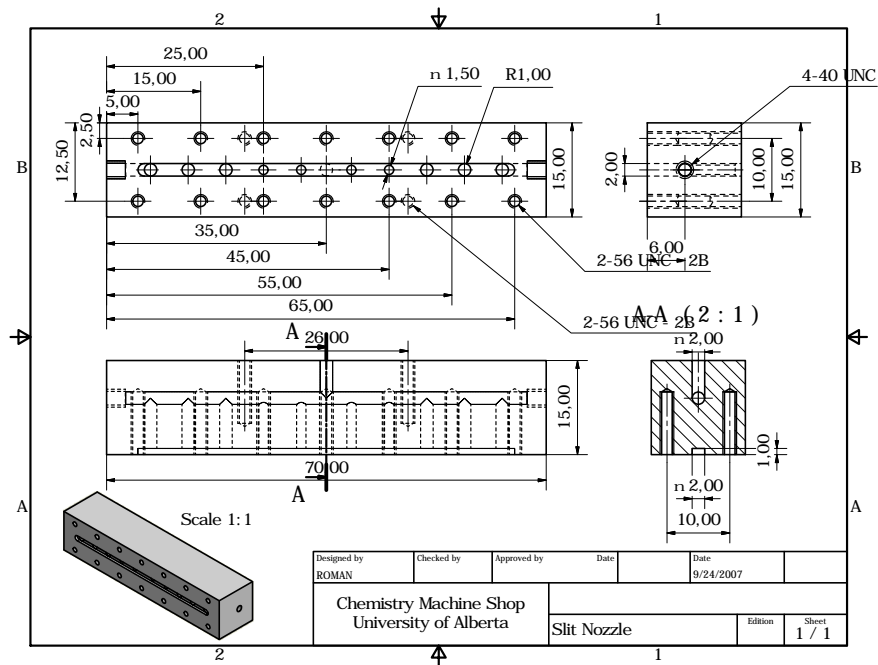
Drawing of homemade nozzle body (8 cm) - With 7 narrow cylindrical channels.
